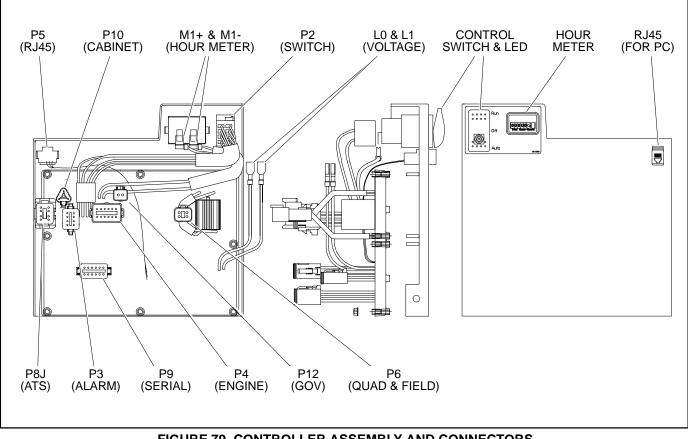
CONTROLLER ASSEMBLY AND CONNECTORS
